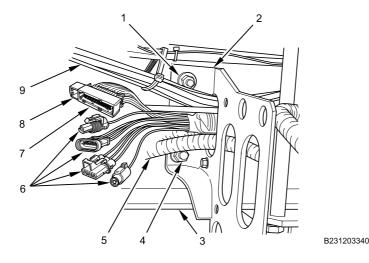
Air Dryer Bracket Frame Nuts and Bolts.
